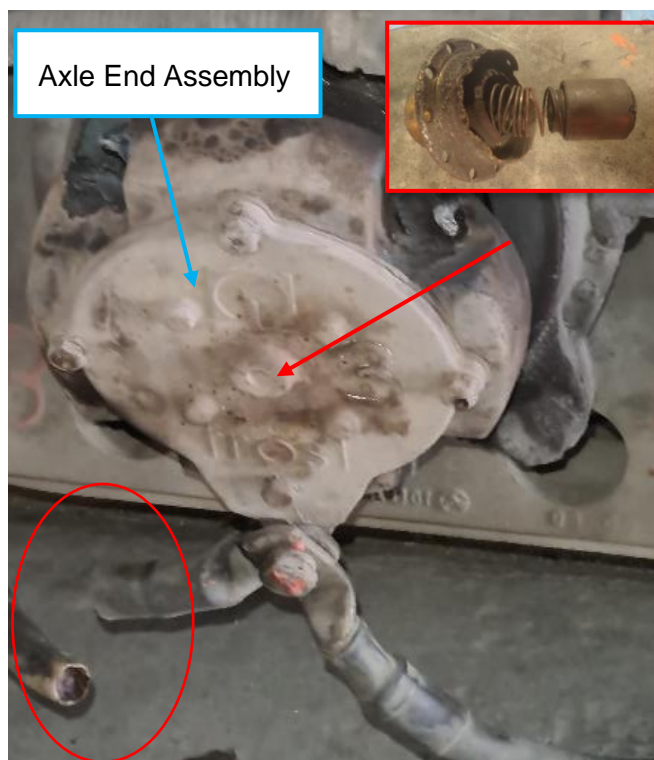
S3 Earth Shunt Cable & S3 Axle End Assembly
